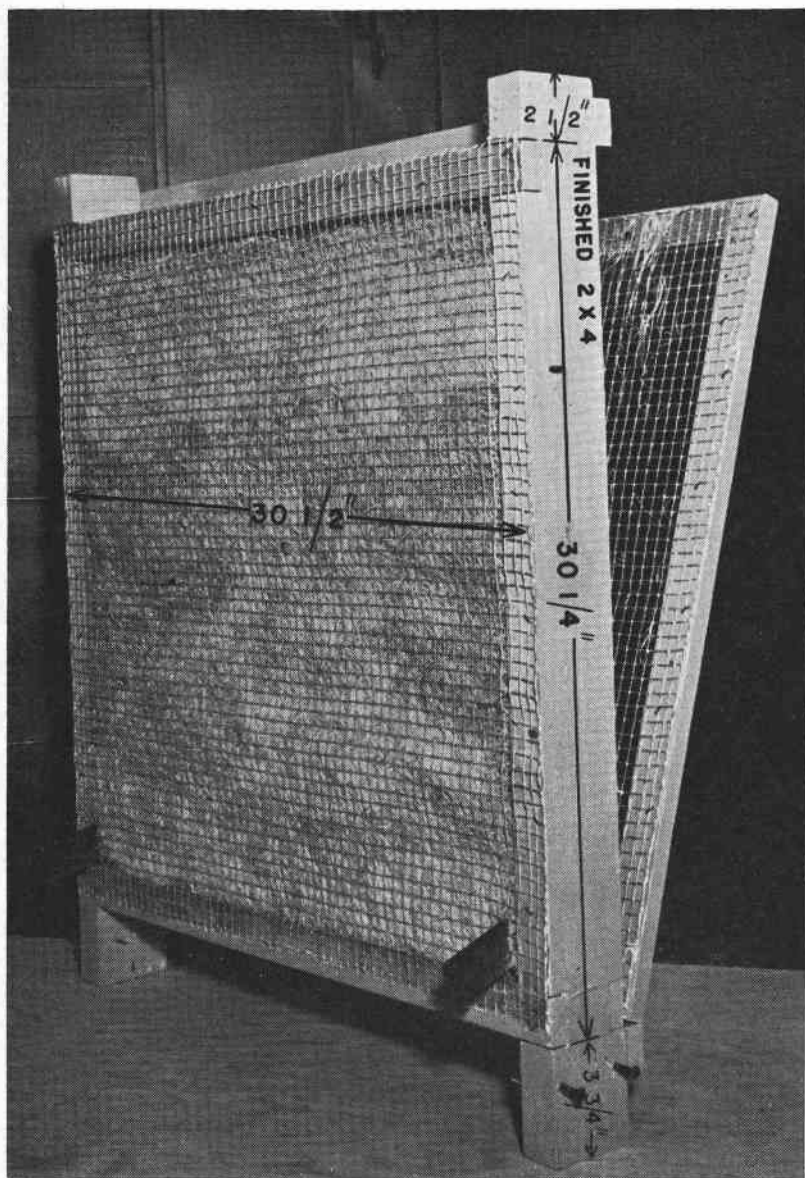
Excelsior pad of evaporator cooler showing construction and dimensions.
